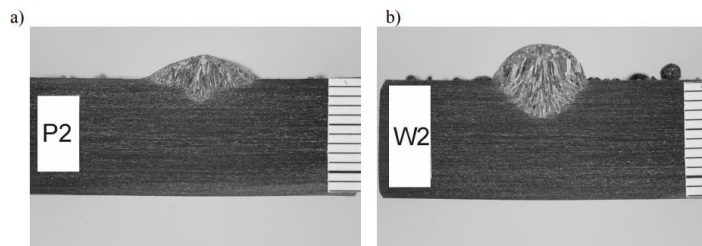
Welded beads performed in the air (a) and underwater (b) with heat input 1.2 kJ/mm[1]
